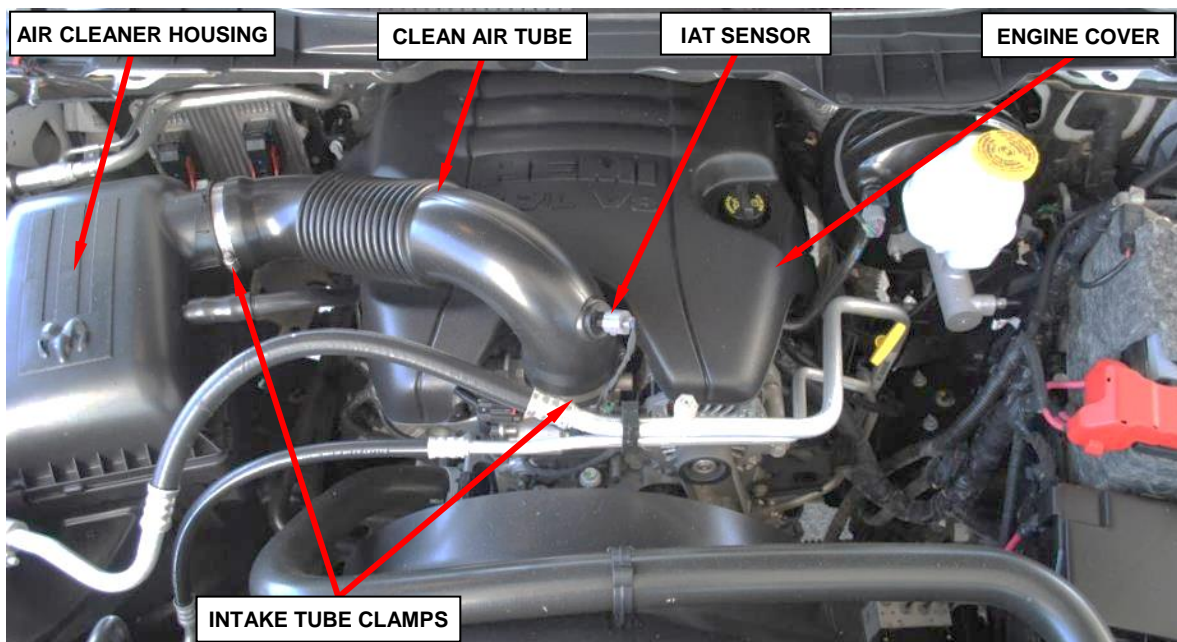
5.7L Clean Air Tube and Engine Cover
